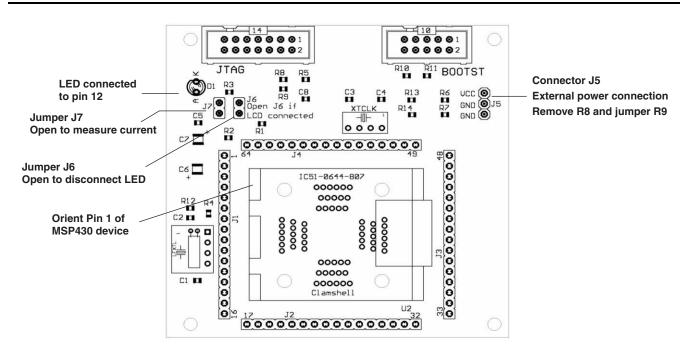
MSP-TS430PM64 Target Socket Module, PCB
